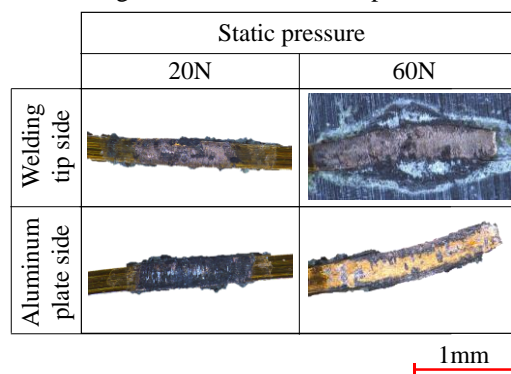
Photographs of the coated copper wire at the after welding.
